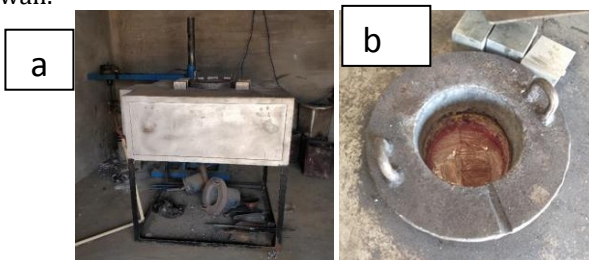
Photographs showing a) Stir casting apparatus b) Clay graphite crucible
